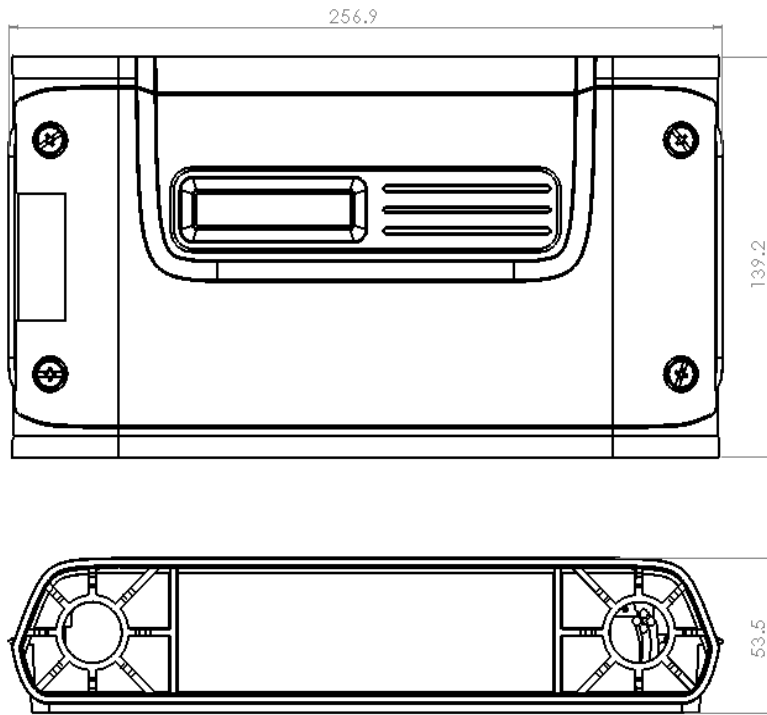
MD-3HD-C-D-N Dimensions in Millimeters.
